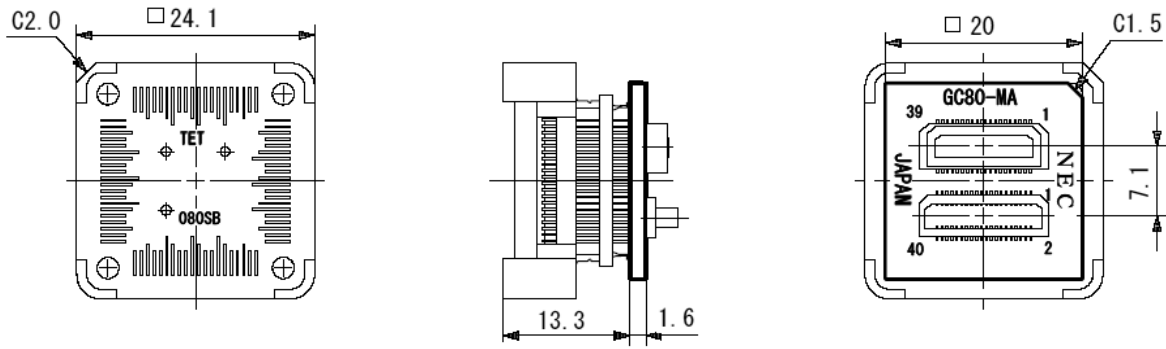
Mount Adapter for V850E/IA3 (80-Pin GC Package)
